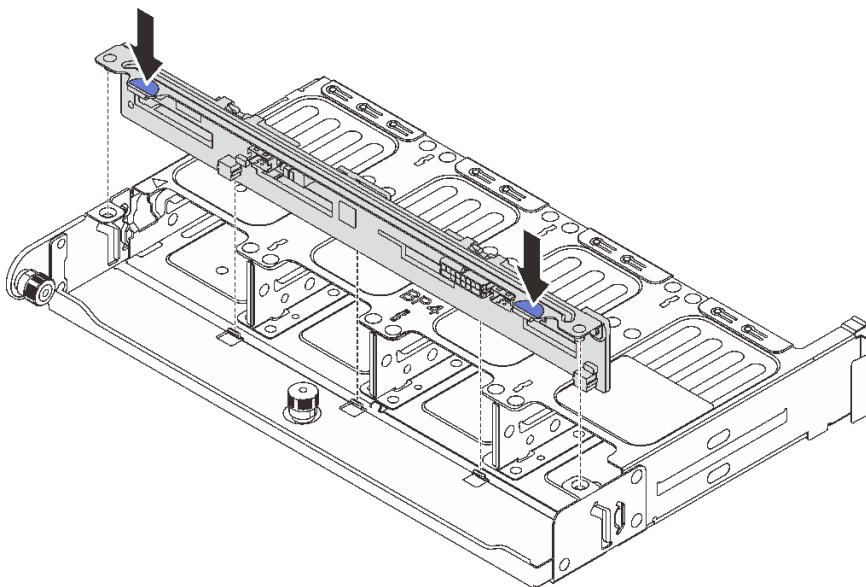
Installing the 8 x 2.5-inch rear drive backplane
